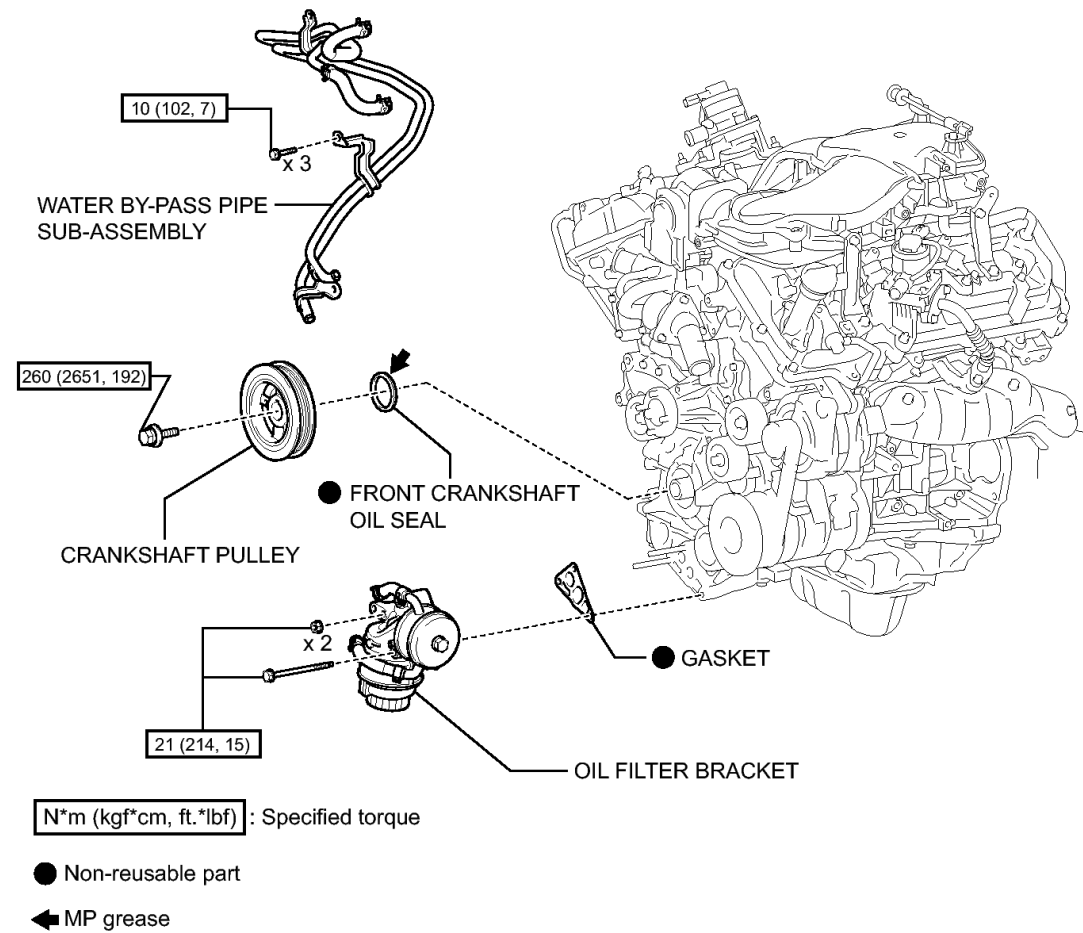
Front Crankshaft Oil Seal Replacement Components With Torque Specifications
